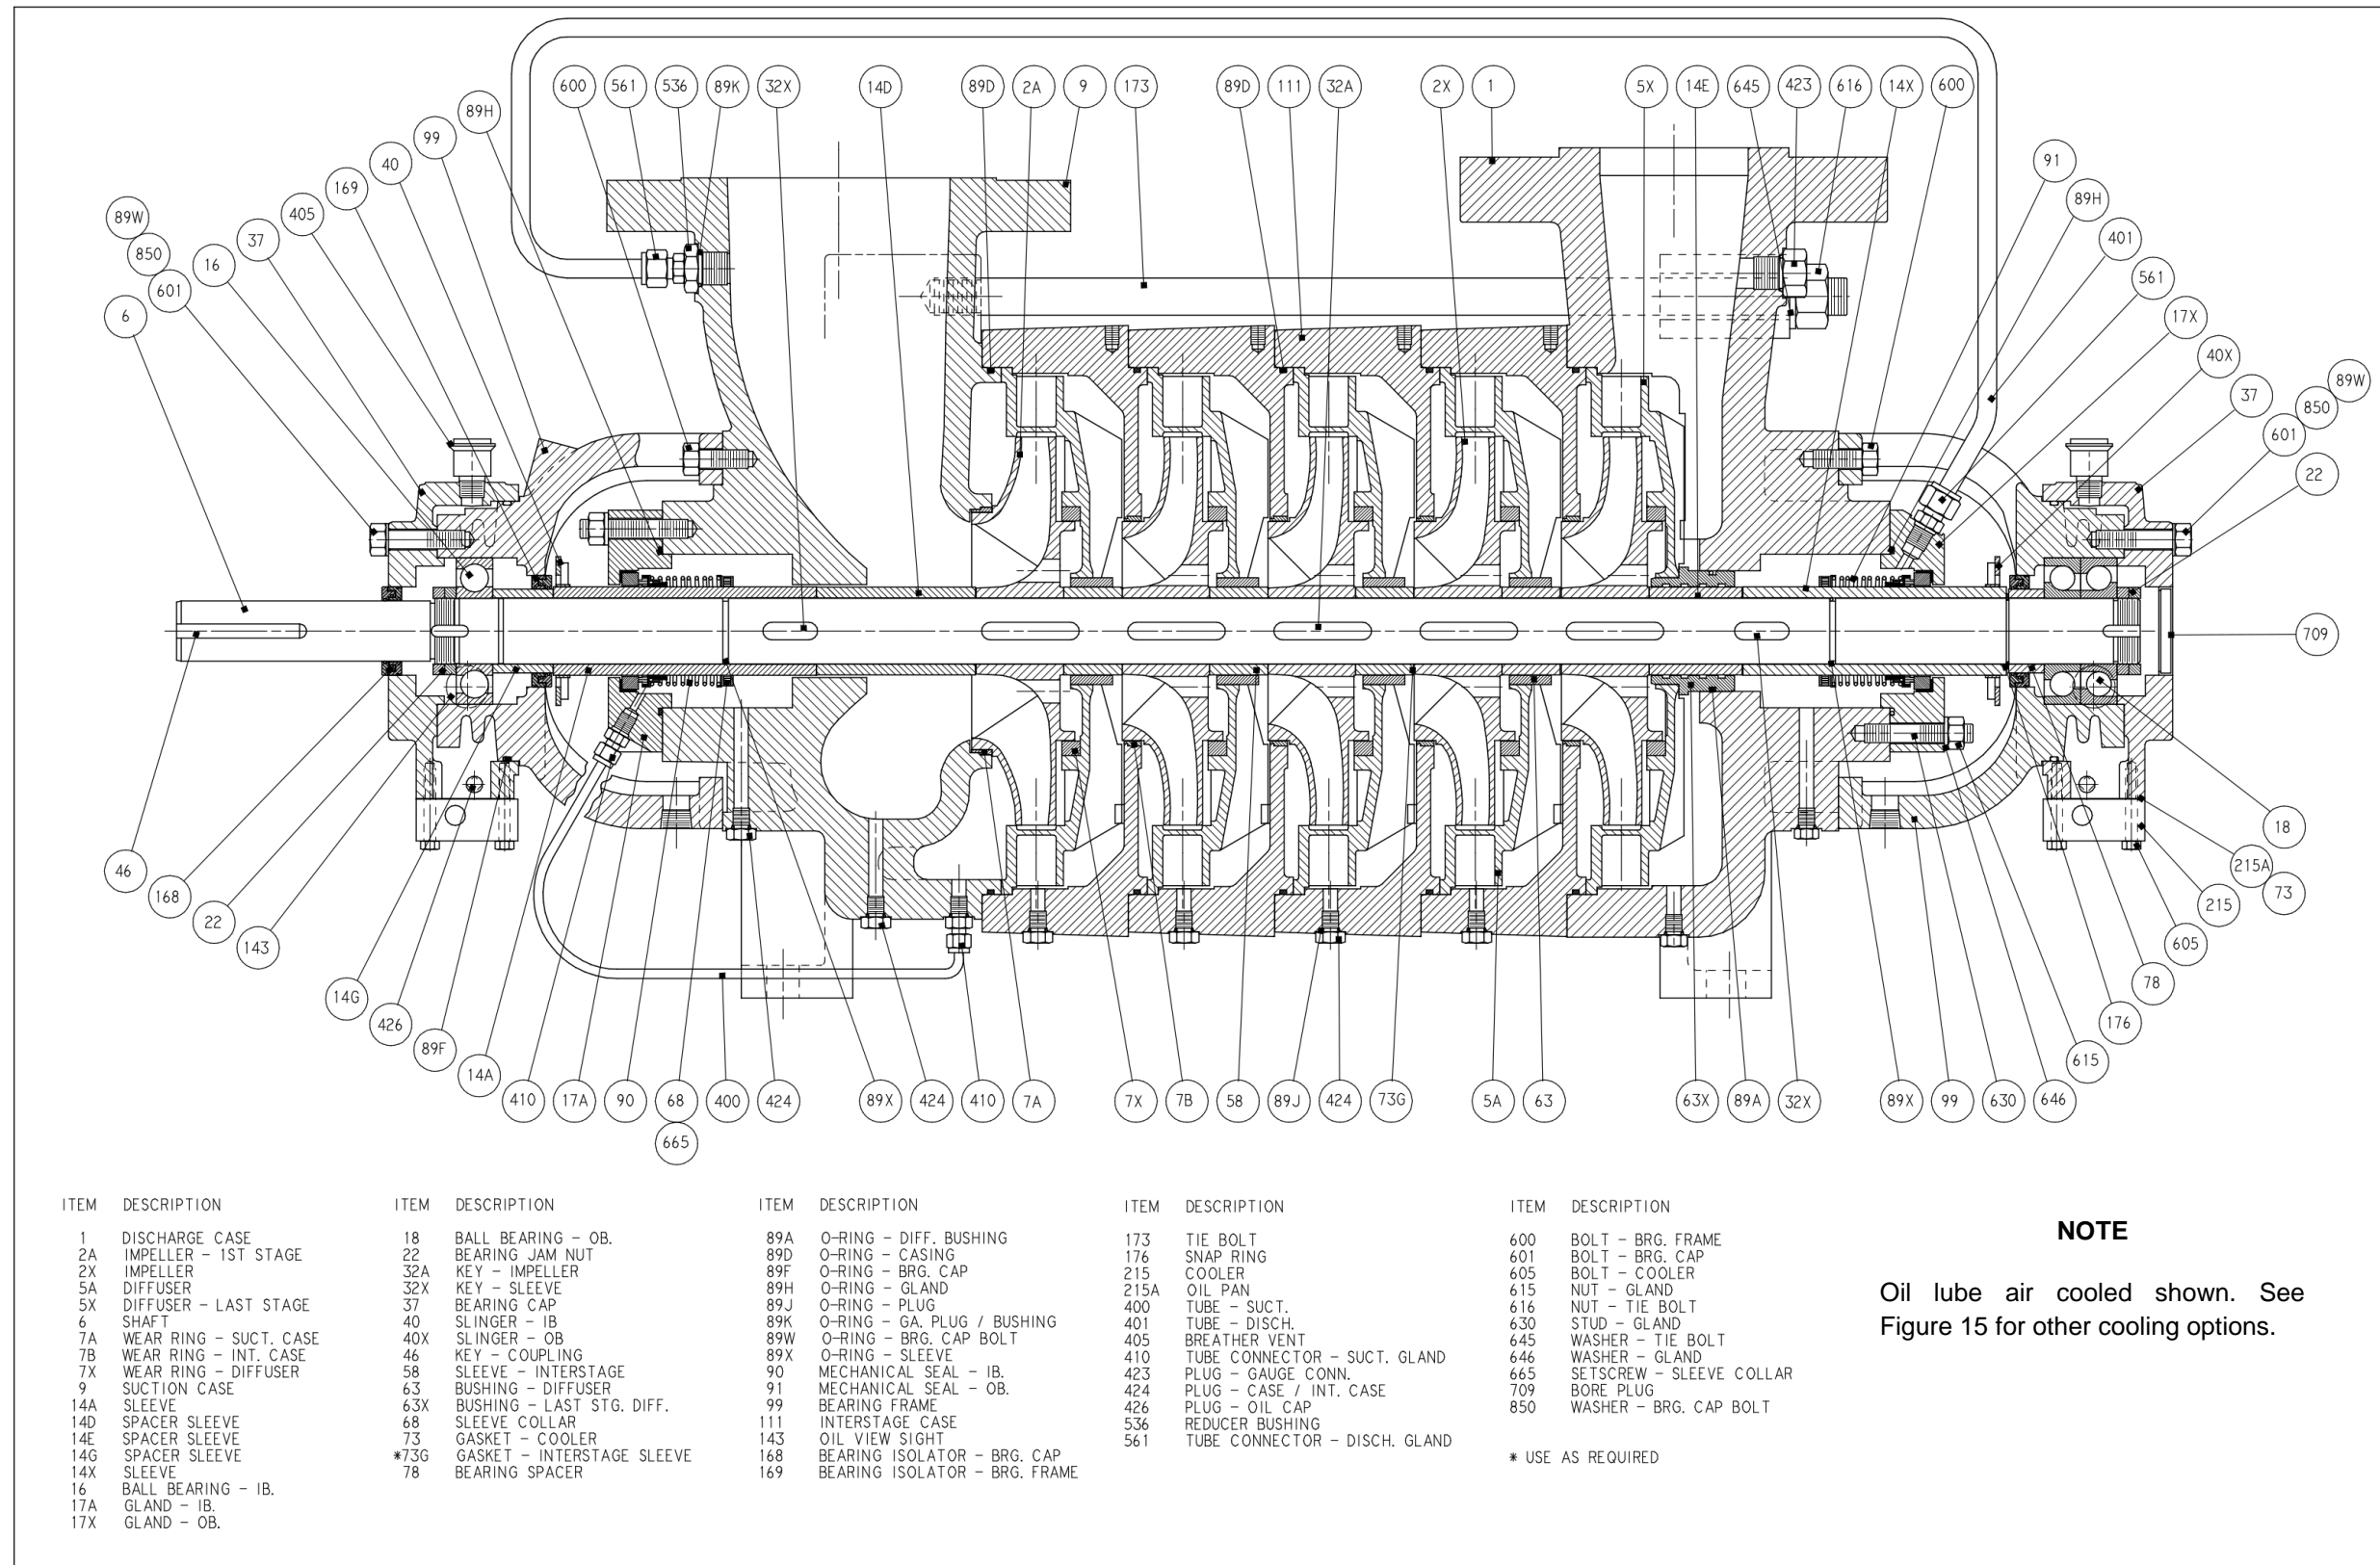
Sectional Assembly – Optional Mechanical Seals
